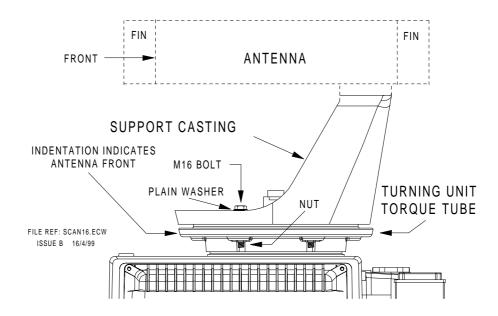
Fixing the Support Casting to the Torque Tube
